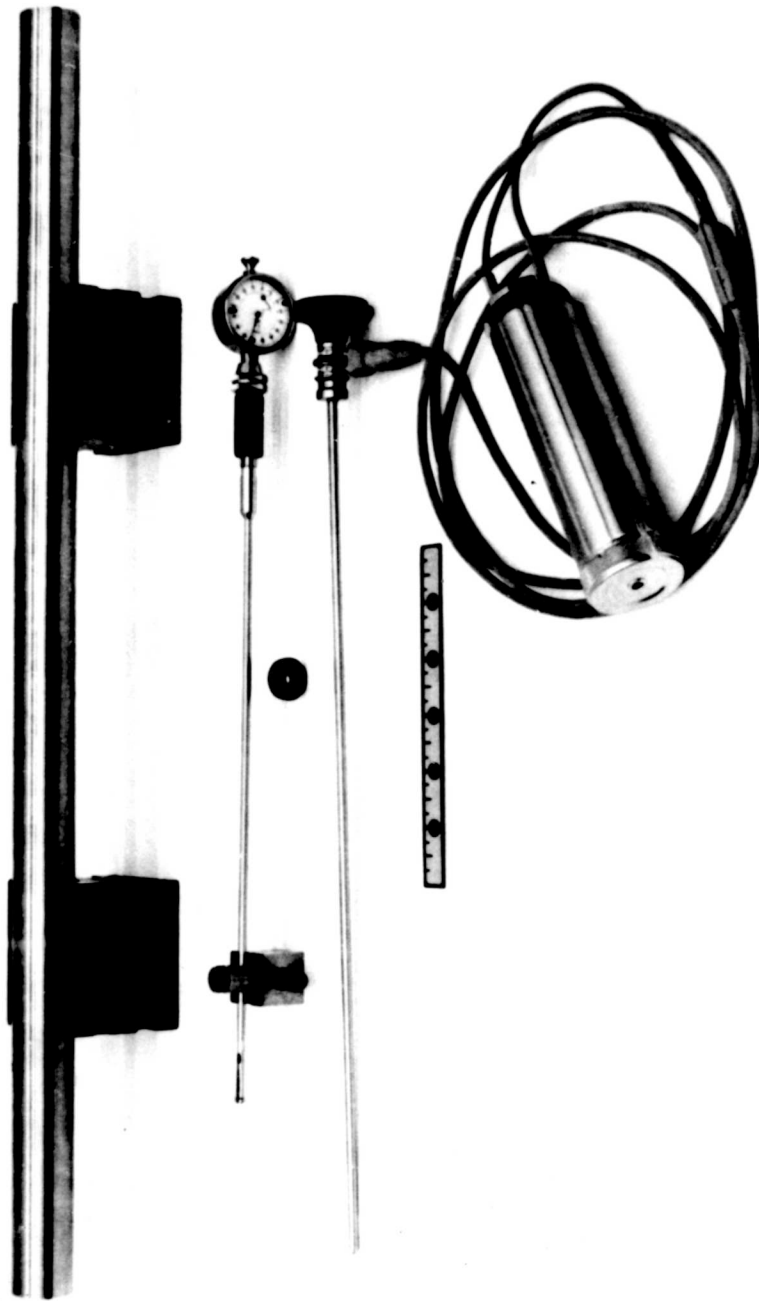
Split-Ball Gauge and Borescope for I. D. Measurement and Inspection of .22 cal Gun Barrels
